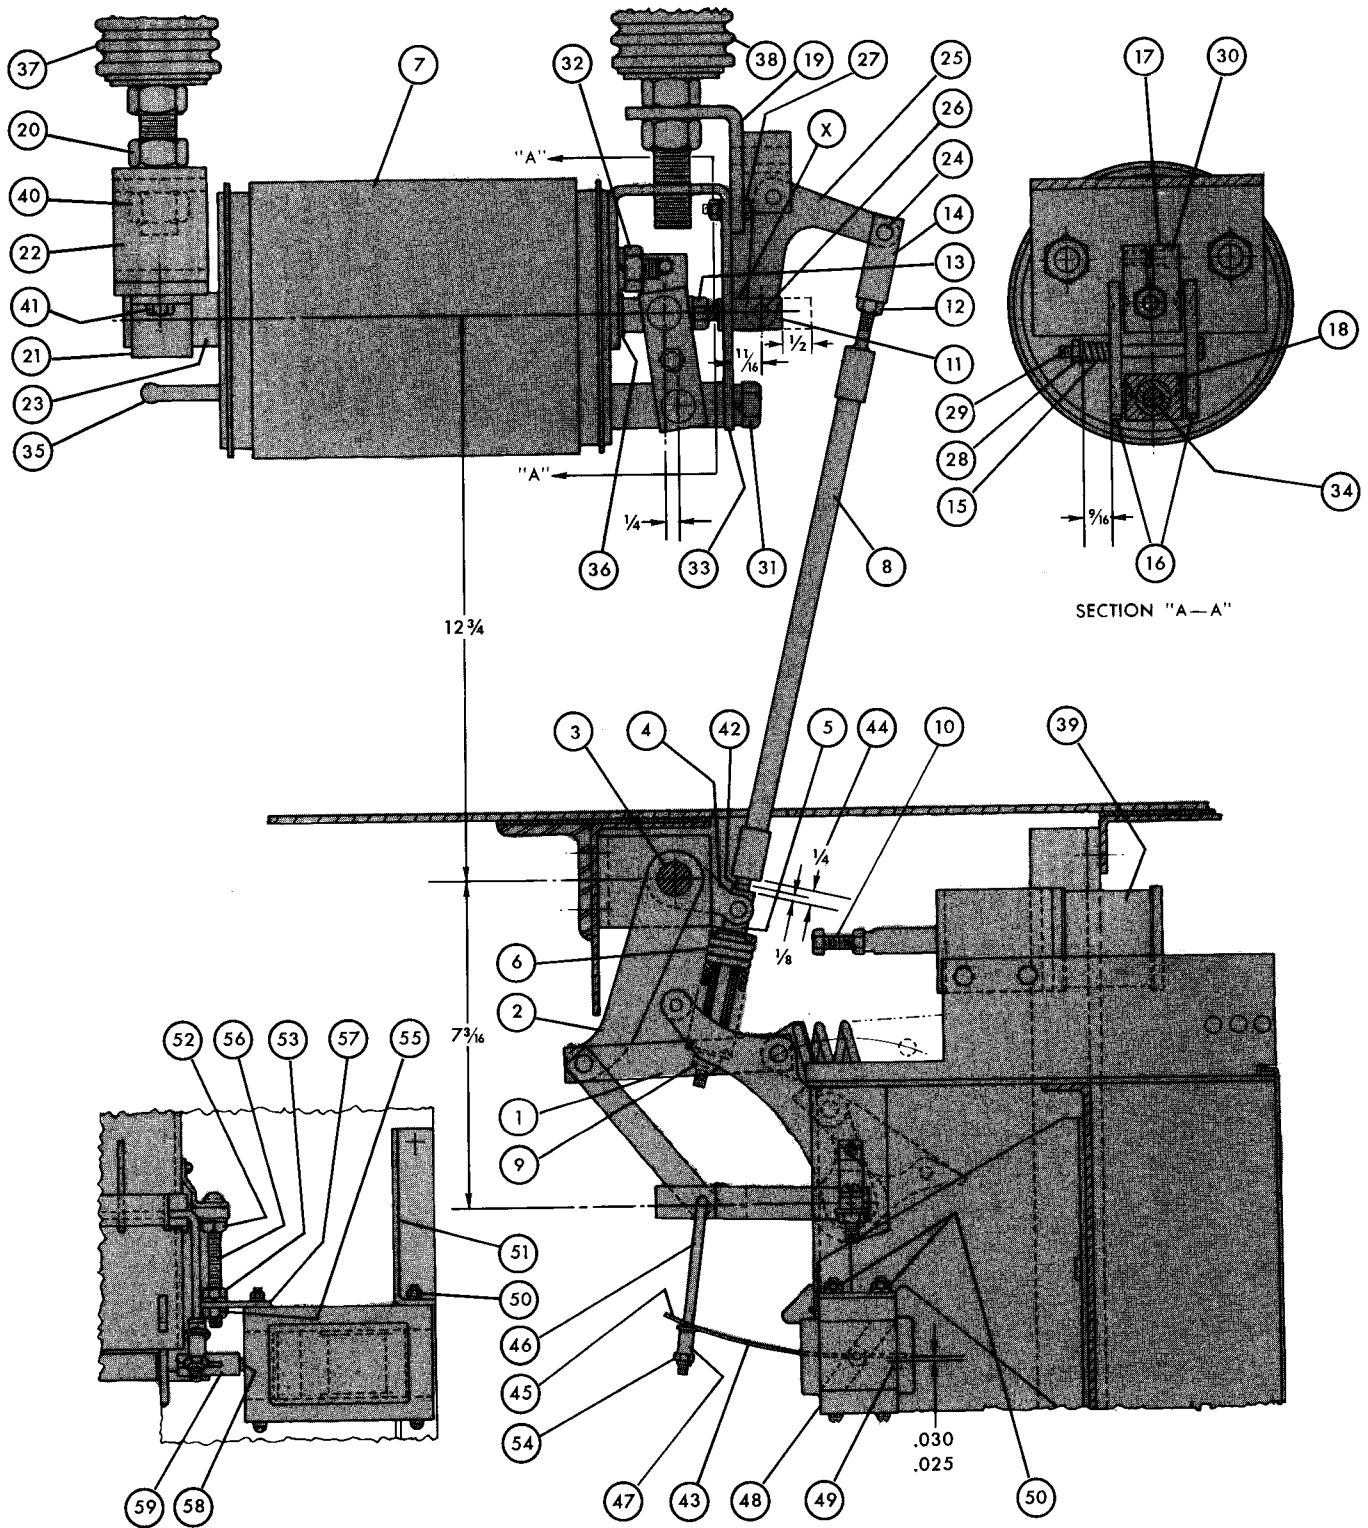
Vacuum Interrupter and Mechanical Linkage.
